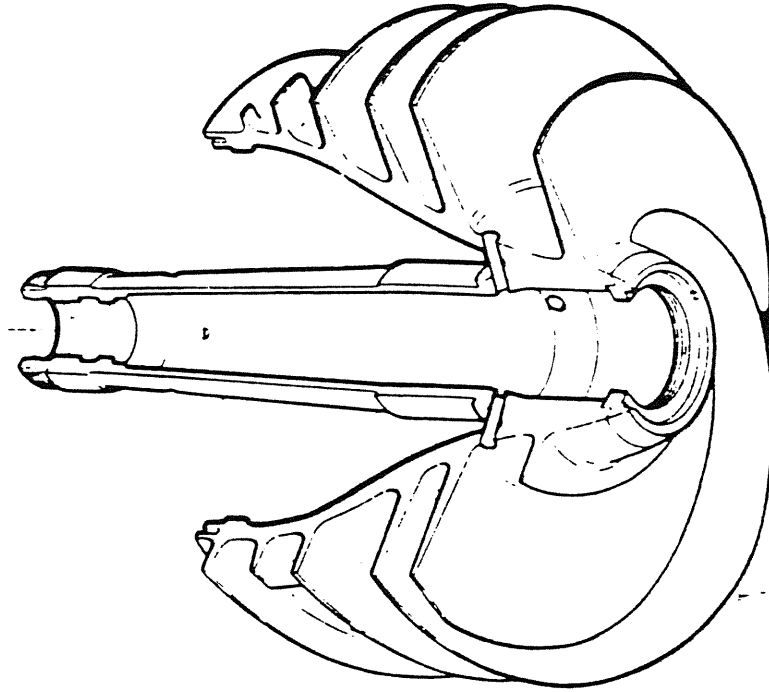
Axial-flow turbomachine: Inducer-type pump.
